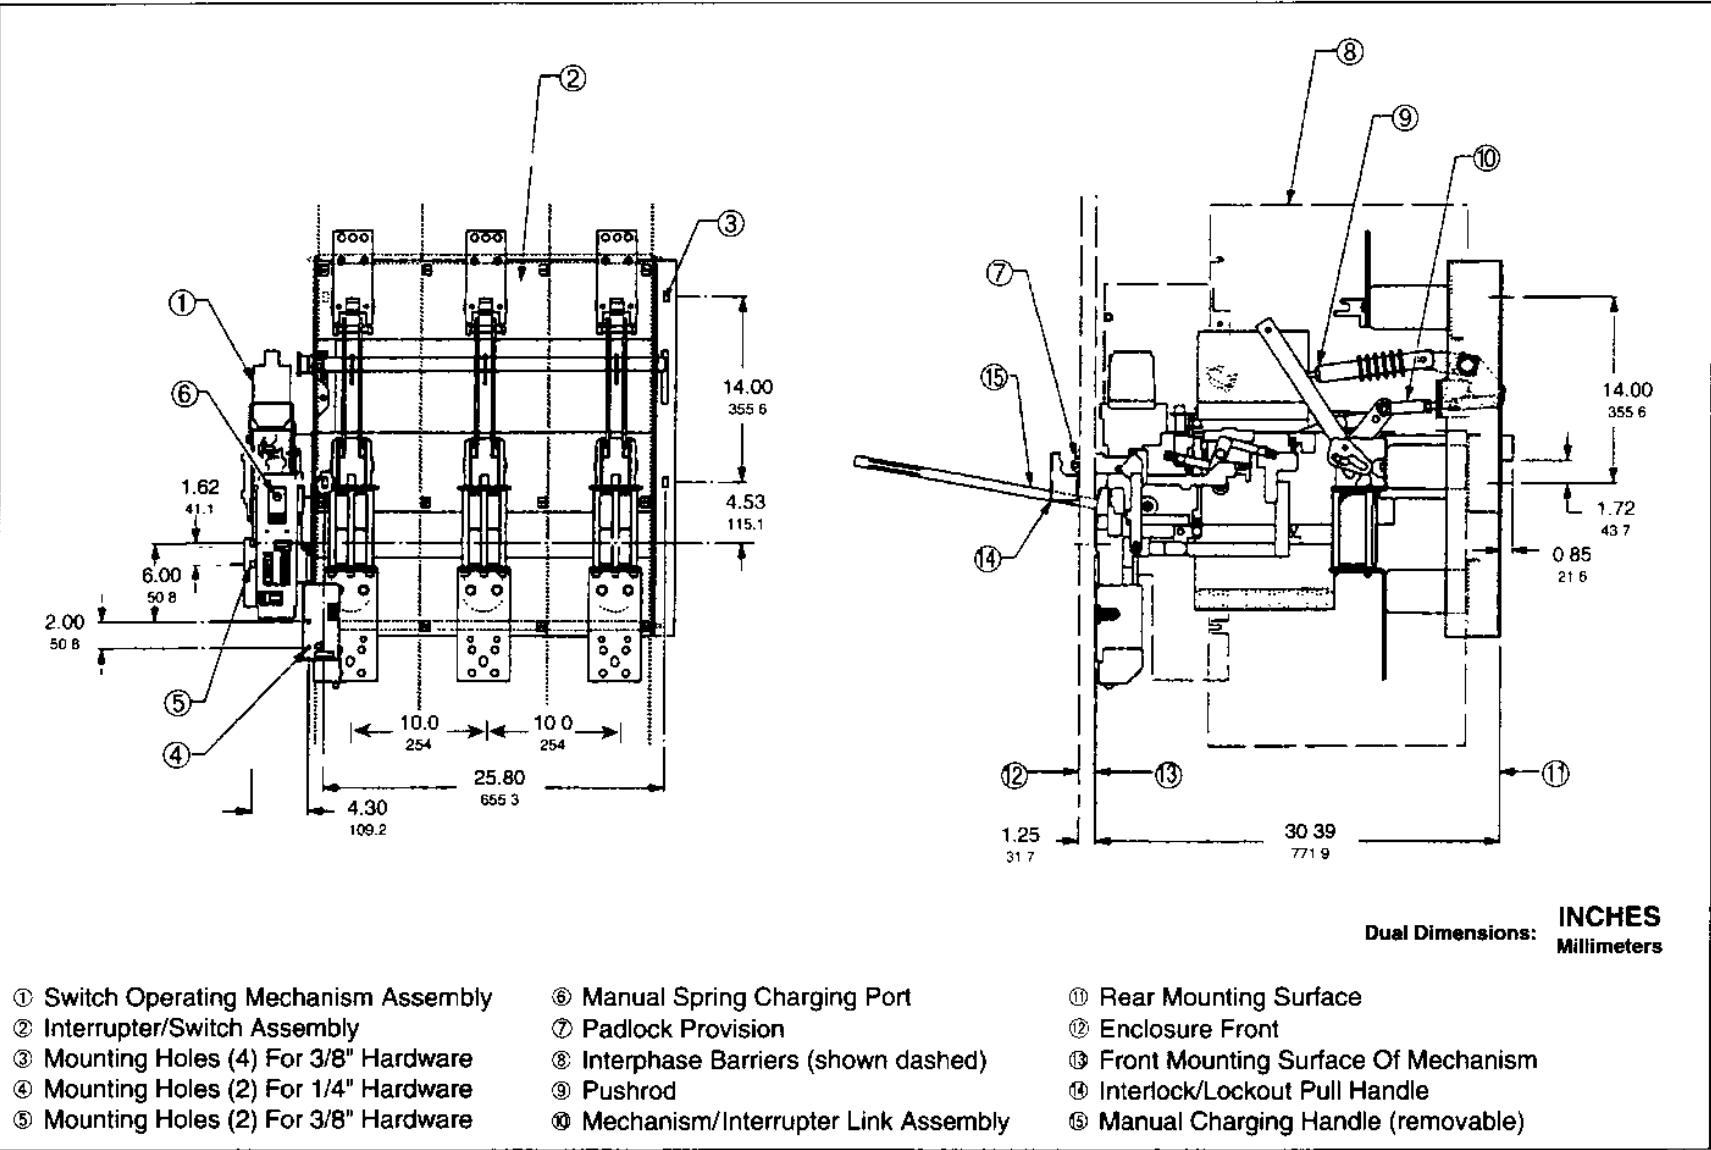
VISI/VAC vacuum circuit interrupter, major components
